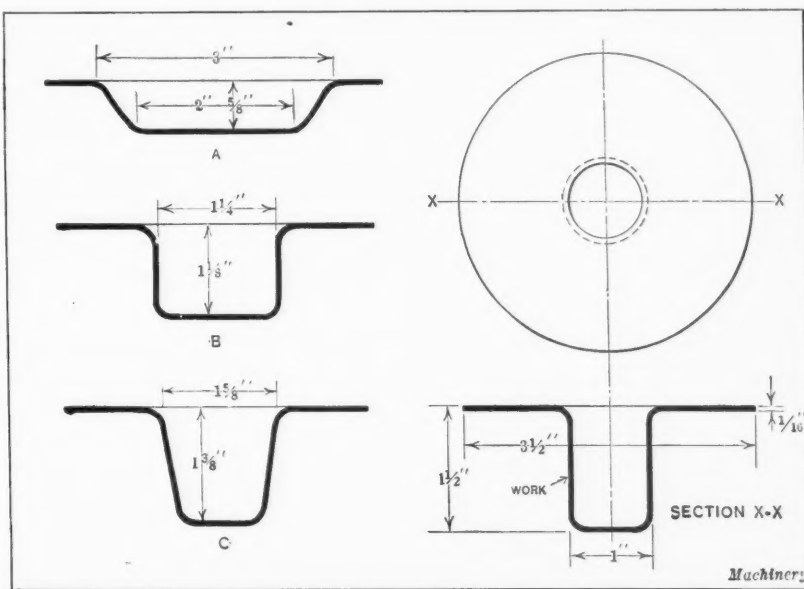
Successive Steps in drawing a Wide-flanged Shell
